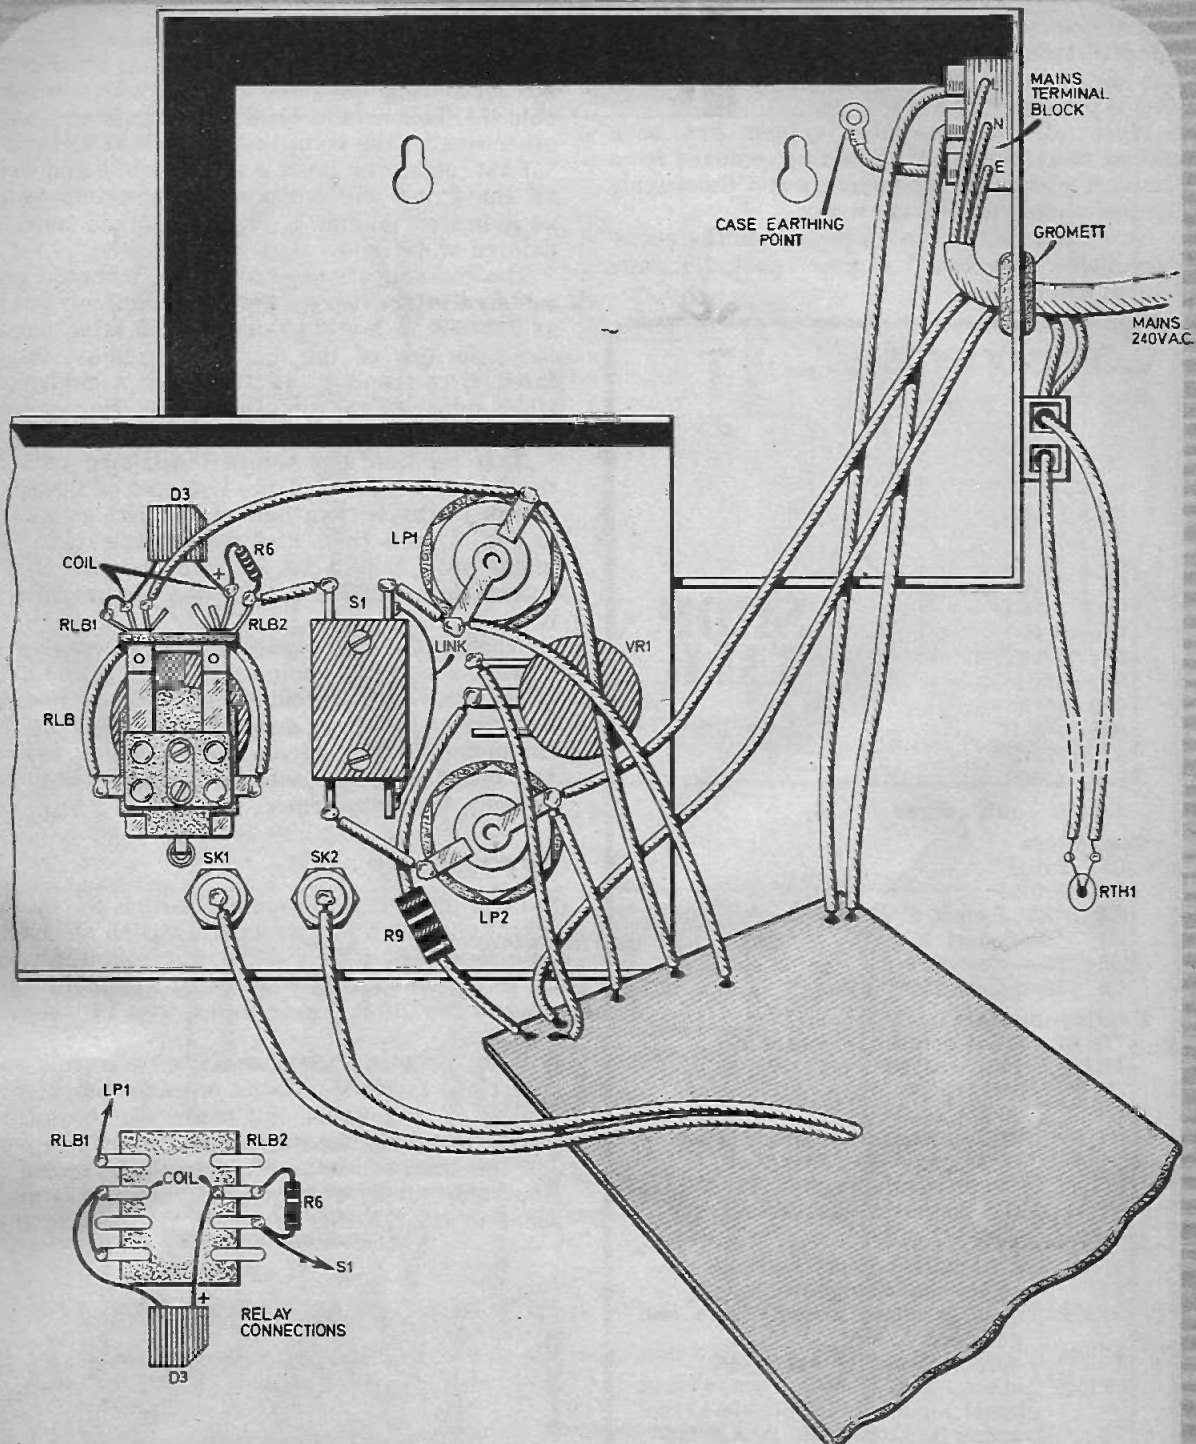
The wiring up of the component board to the case mounted components. Also shown is the wiring around the buzzer relay.
